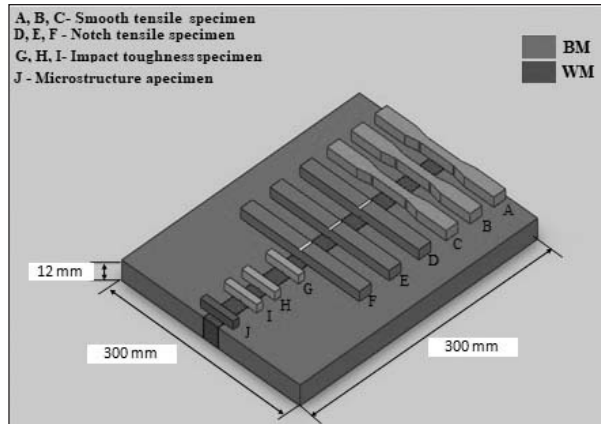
Scheme of extraction of specimens from the welded joints.
